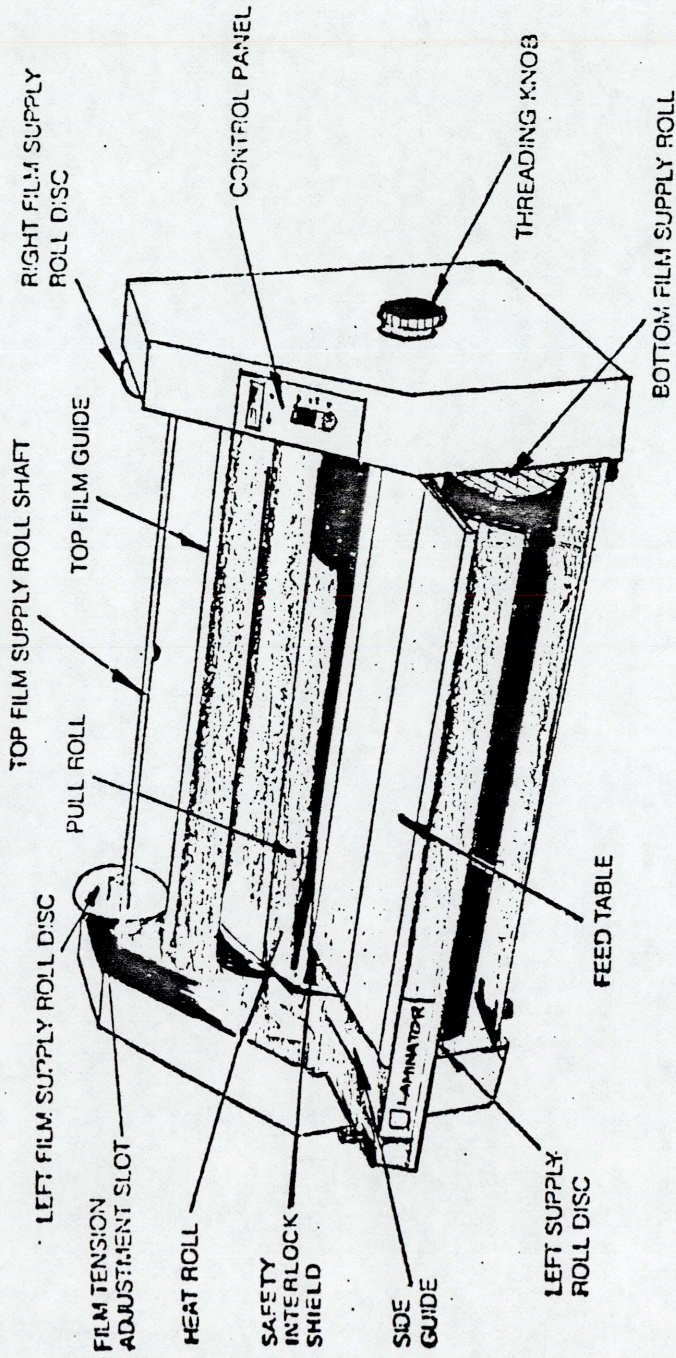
DRY FILM PHOTORESIST LAMINATION MACHINE.
